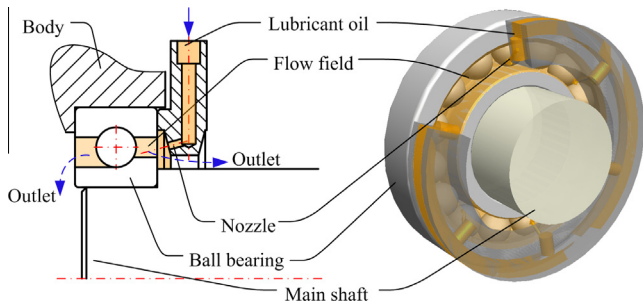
Multiple-nozzle oil-jet mechanism for the high-speed rolling bearing.
